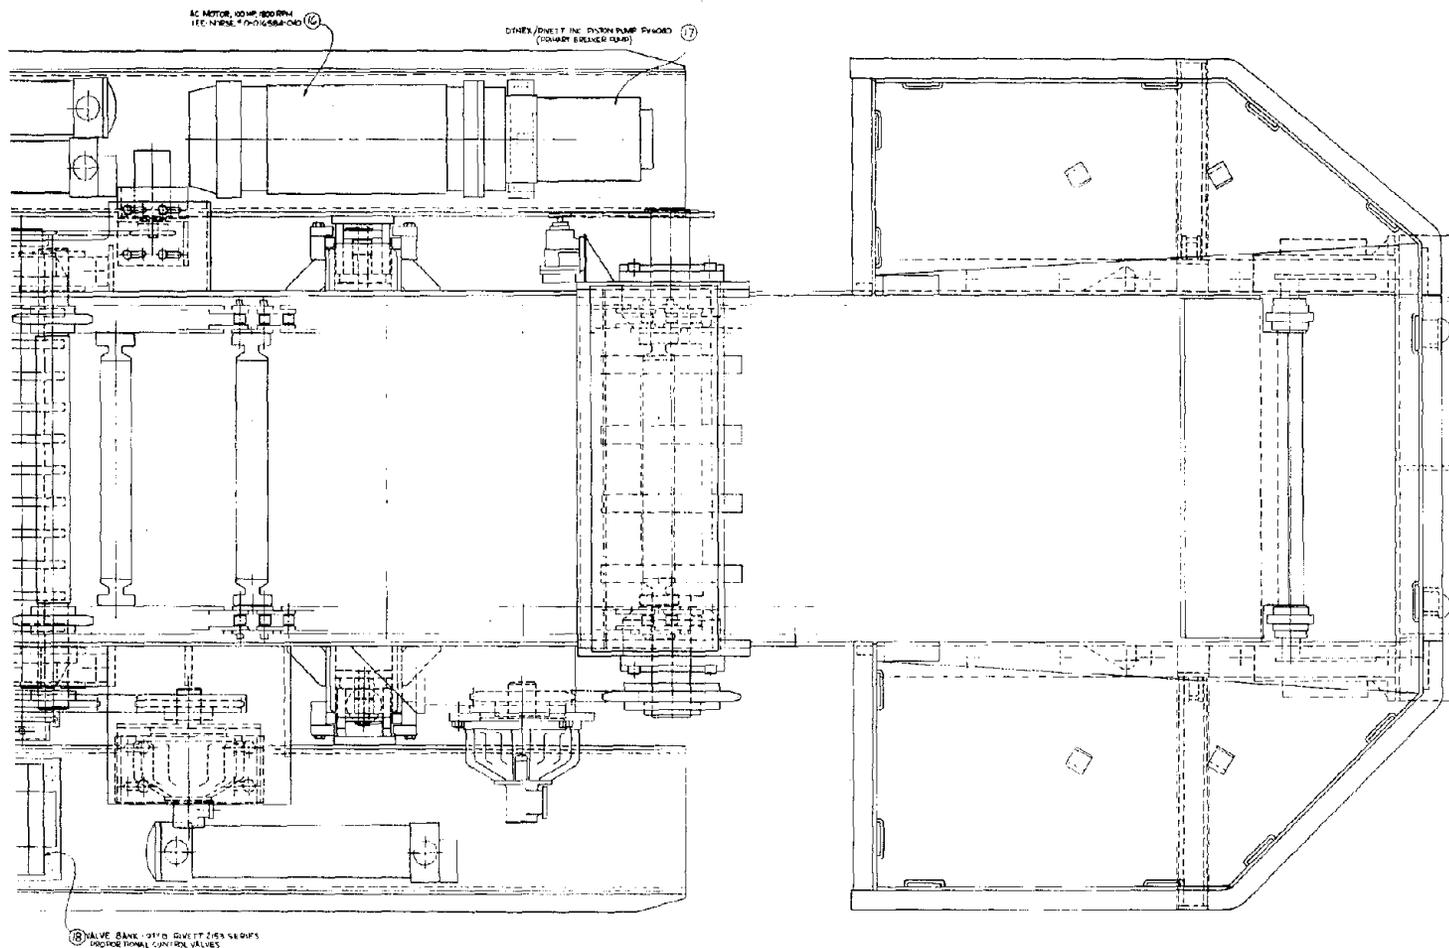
Ingersoll-Rand/S&S Jet Pump Injector Vehicle, Front Top View. A copy of the full scale design drawing is on file with the Bureau of Mines.
